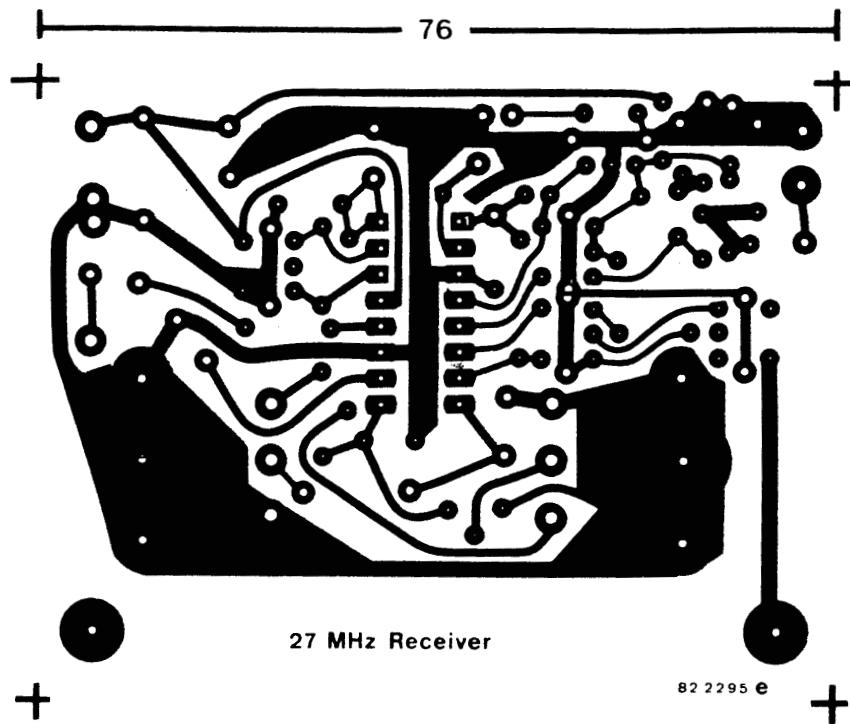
Layout of circuit board (soldered side) for 27 MHz–receiver
